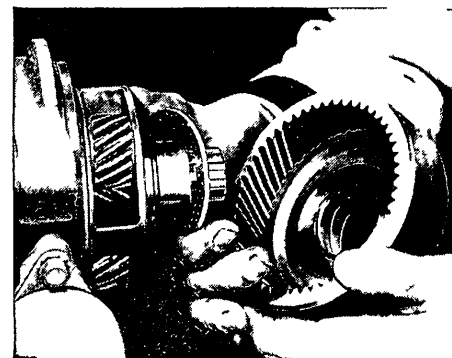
Remove overdrive clutch and gear and cage thrust washer. If clutch is to be removed from ring gear, remove snap ring and paint a mark on ring gear and clutch to permit reassembly in same position
